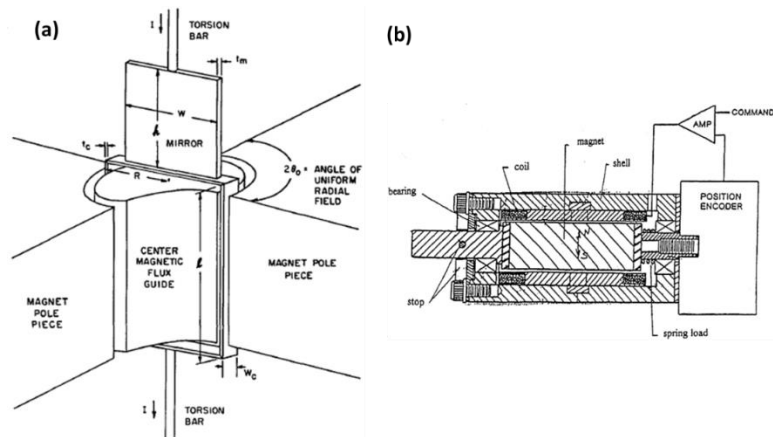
(a) Schematic view of oscillating galvanometer and (b) illustration of all inside construction elements [8].
